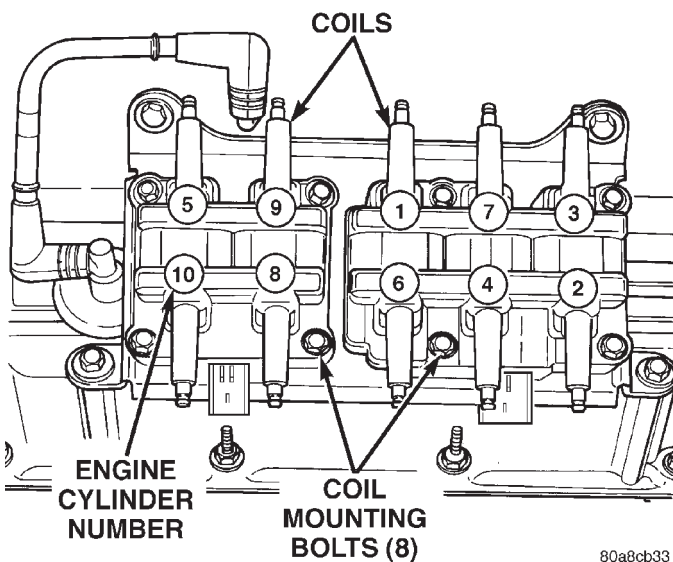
Ignition Coil Packs—8.0L V-10 Engine
